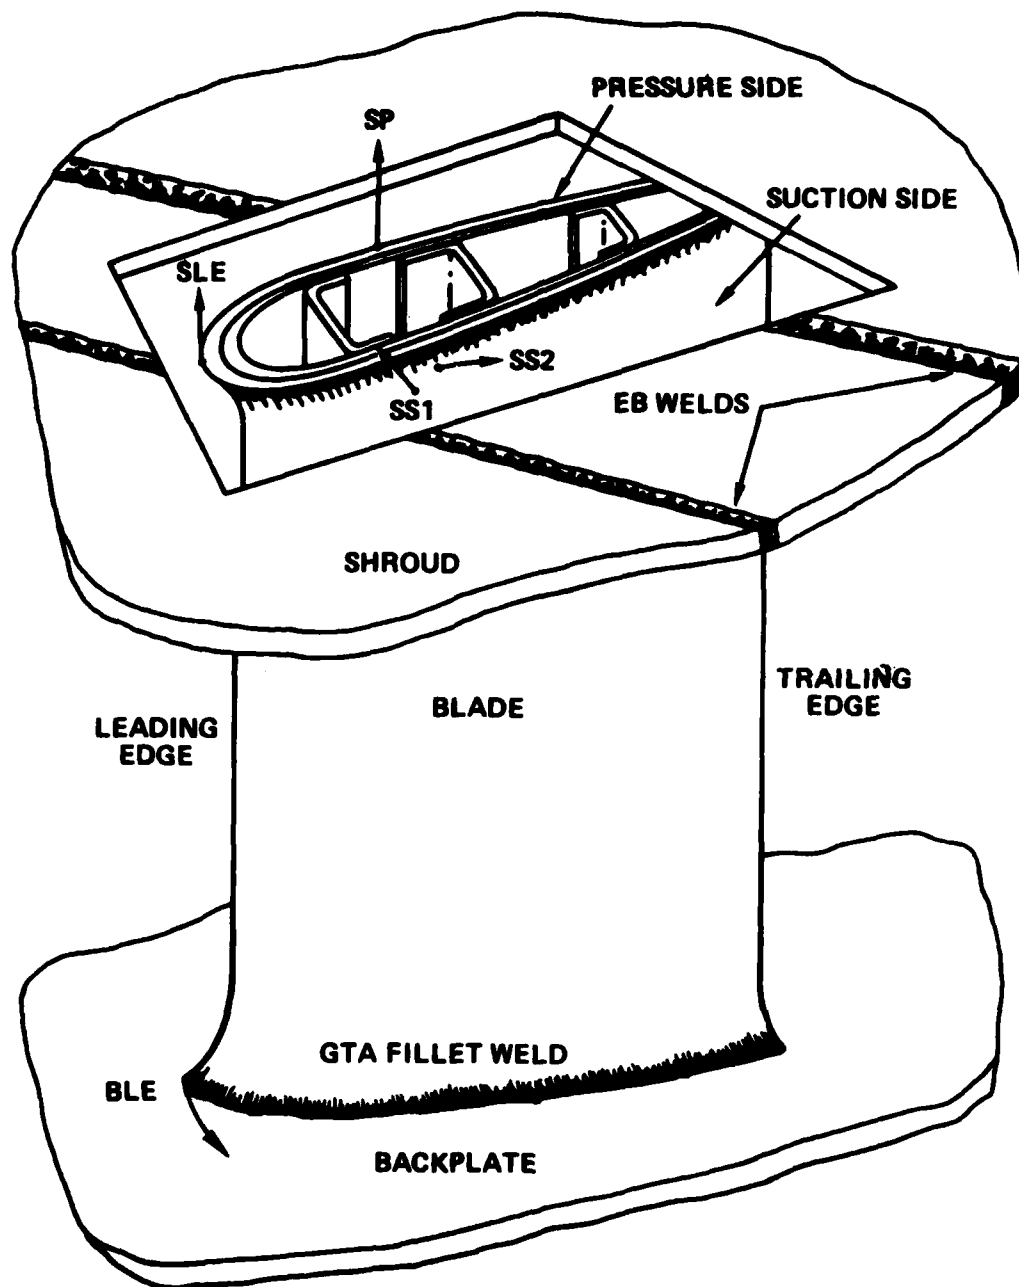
Representative Fracture Locations and Directions in a JEFF(A) Fan Rotor
